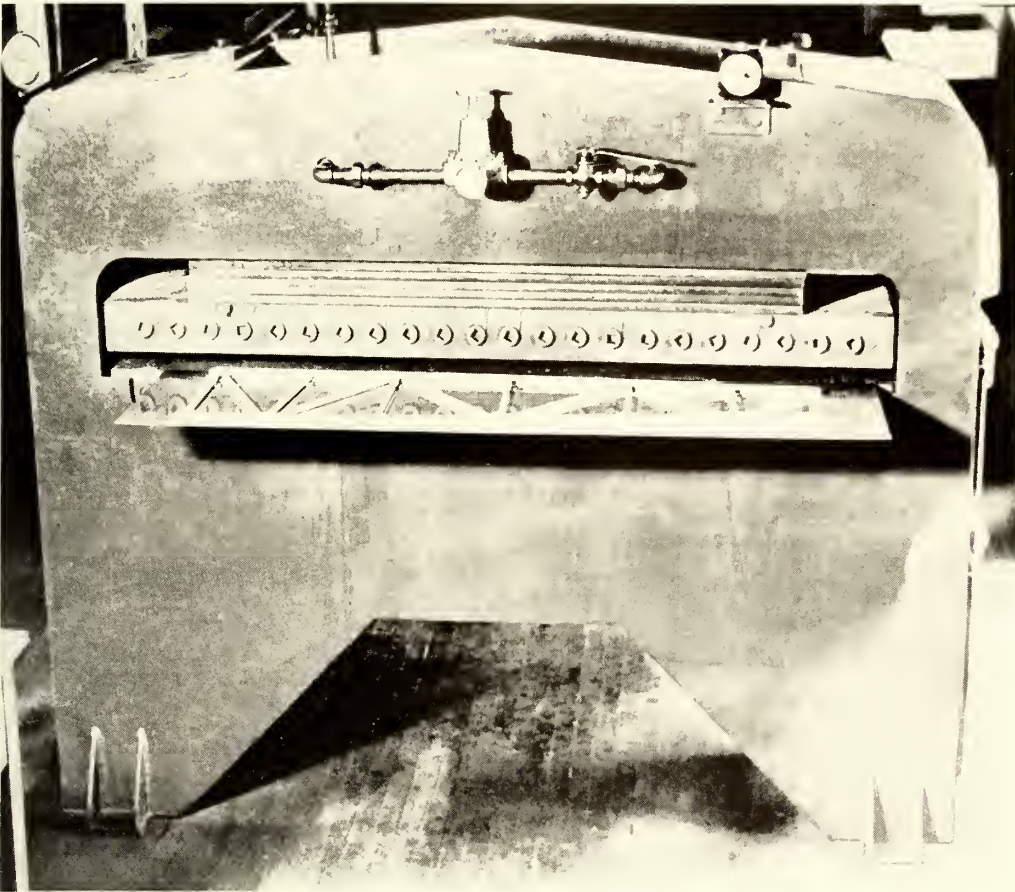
Quick-closing, fire-hose hot press for assembling ribs and similar small parts.
